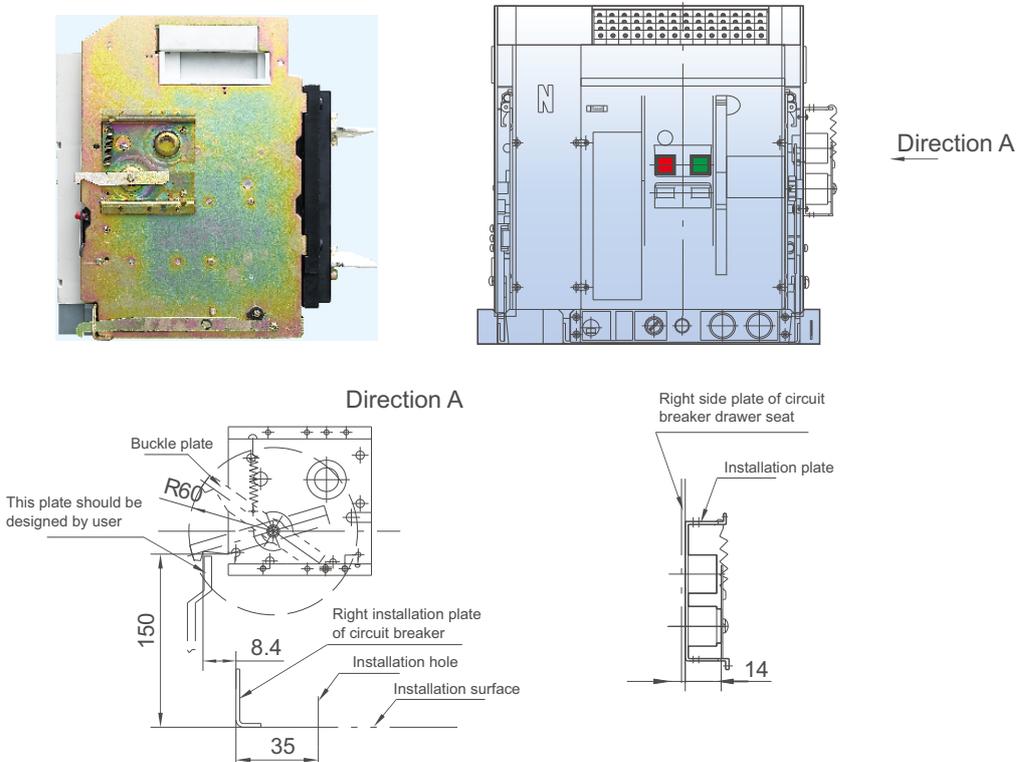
NA8G-1600 withdrawable type circuit breaker status door interlock installation dimensions
